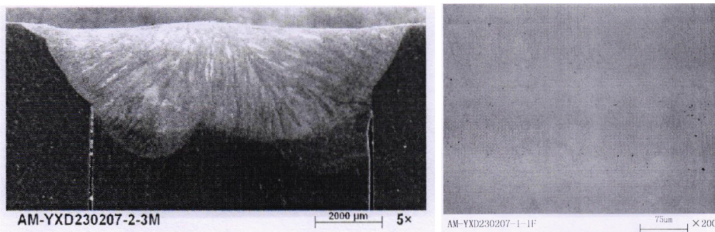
Photograph of metallographic and intergranular corrosion of mixed welds
